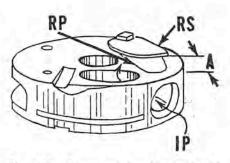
Center main bearing showing inlet reed valves. Refer to text for adjustment.
